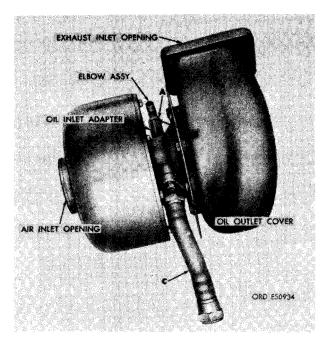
REMOVING OR INSTALLING TURBOSUPERCHARGER OIL DRAIN HOSE AND OIL INLET ELBOW AS-SEMBLY (EARLY MODEL ENGINES).
